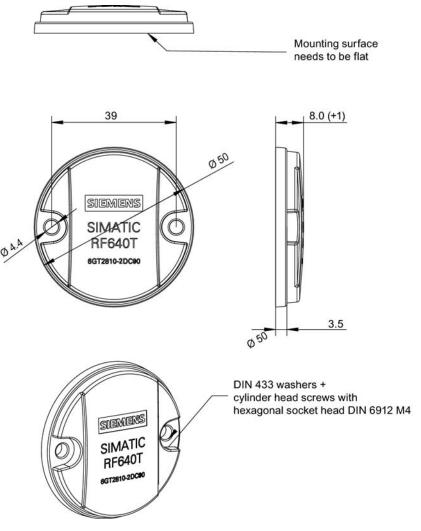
SIMATIC RF640T UHF Tool Tag Version 1
